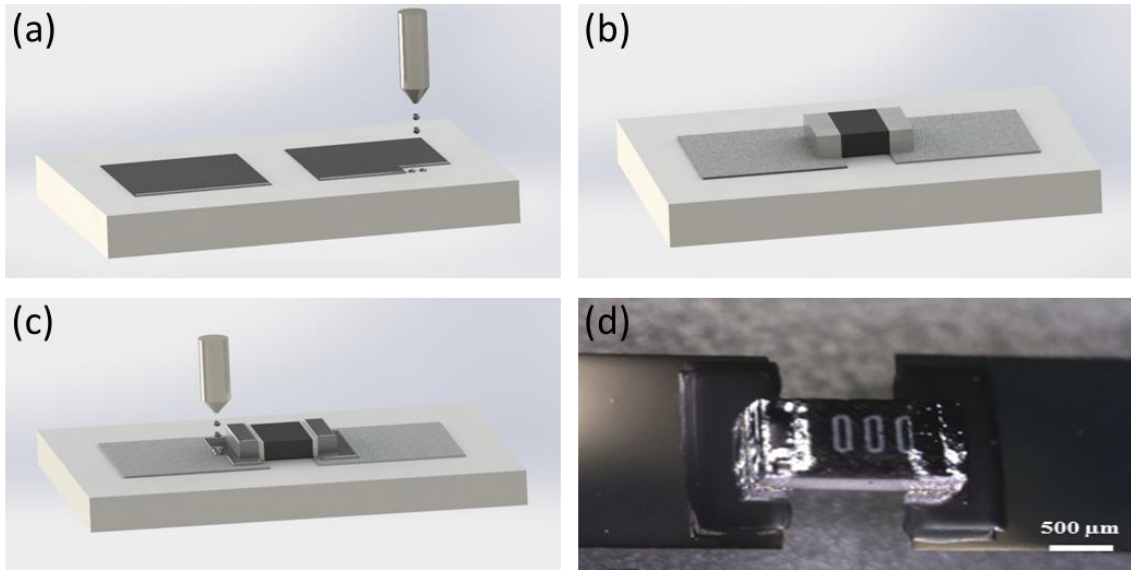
Hybrid manufacturing (a) Illustration of conductive strips printing process. (b) Illustration of conductive strips sintered and SMD located. (c) Illustration of SMD AgNP ink assembling method. (d) Picture of SMD 0402 package of 0 Ω AgNP ink-assembled.
